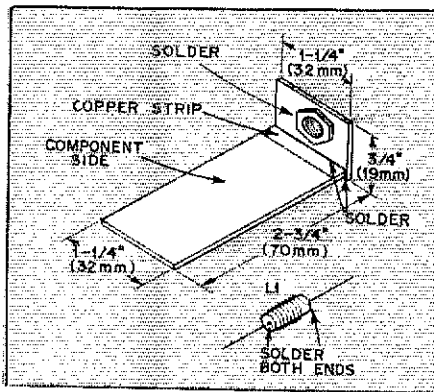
The dimensions and construction of the pc board and BNC-connector upright. At the right is L1, an eight-turn coil of no. 28 wire wound on the body of a 1000-ohm (or higher), 1/2-watt resistor.
